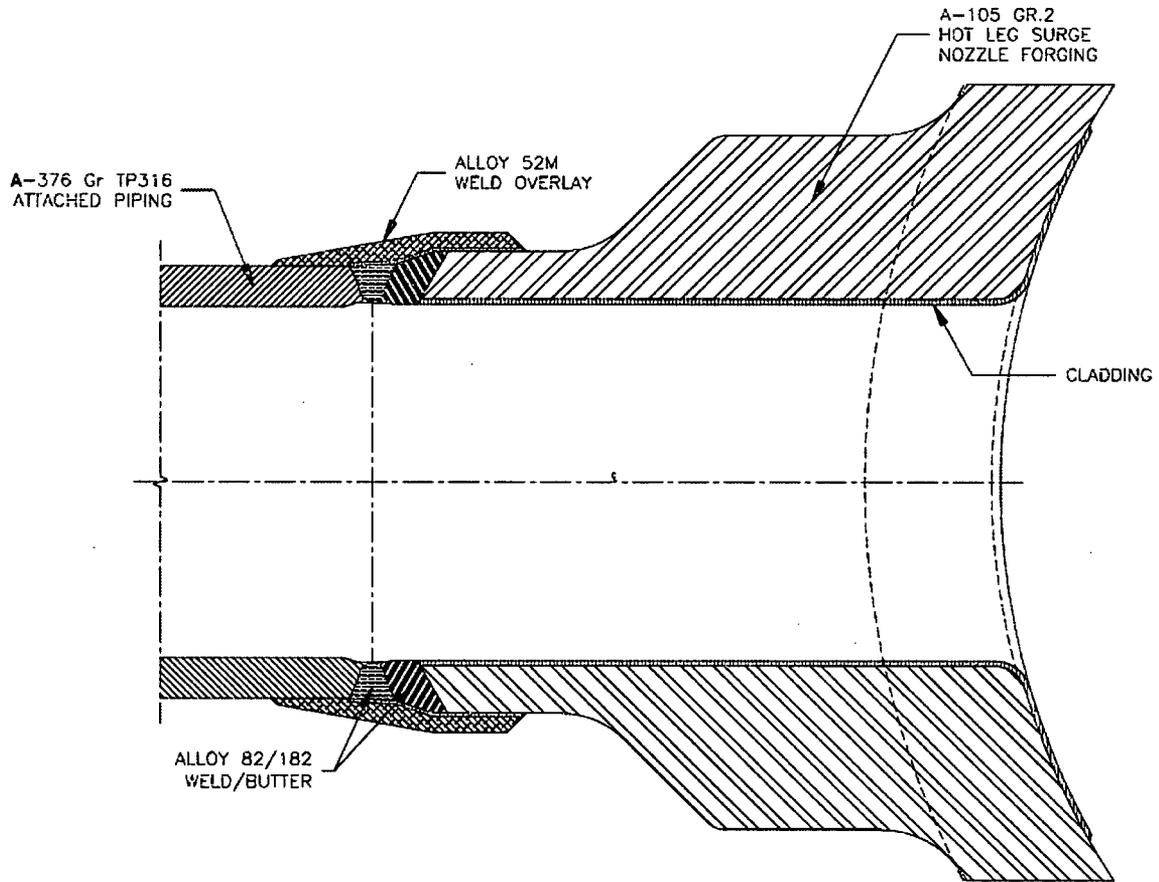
Hot Leg Surge Nozzle Weld Overlay
